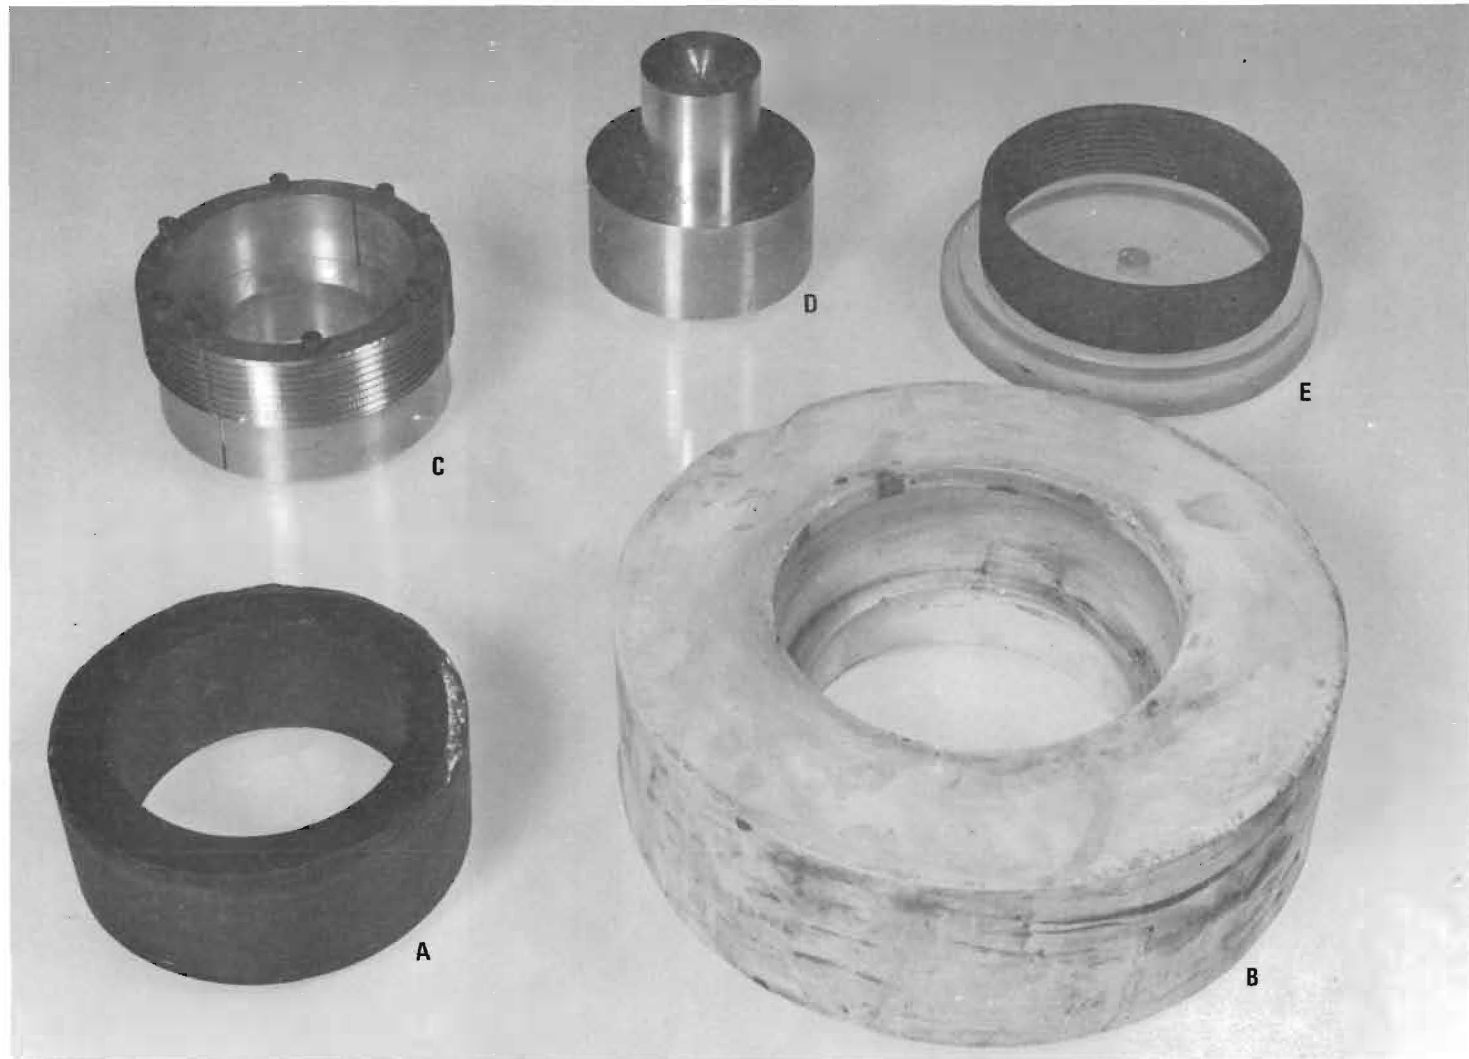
Disassembled Mold Showing Parts Required and Slip-Cast Silicon Ring.
